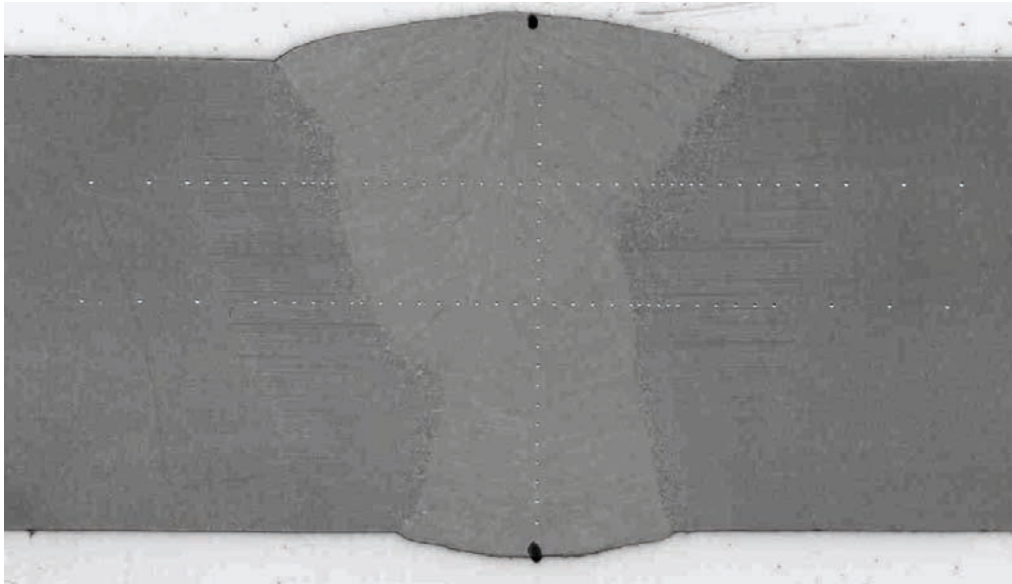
1” HSLA-65 One-sided Weld, ESAB OK10.62 – Macro – 2.5X Mag
